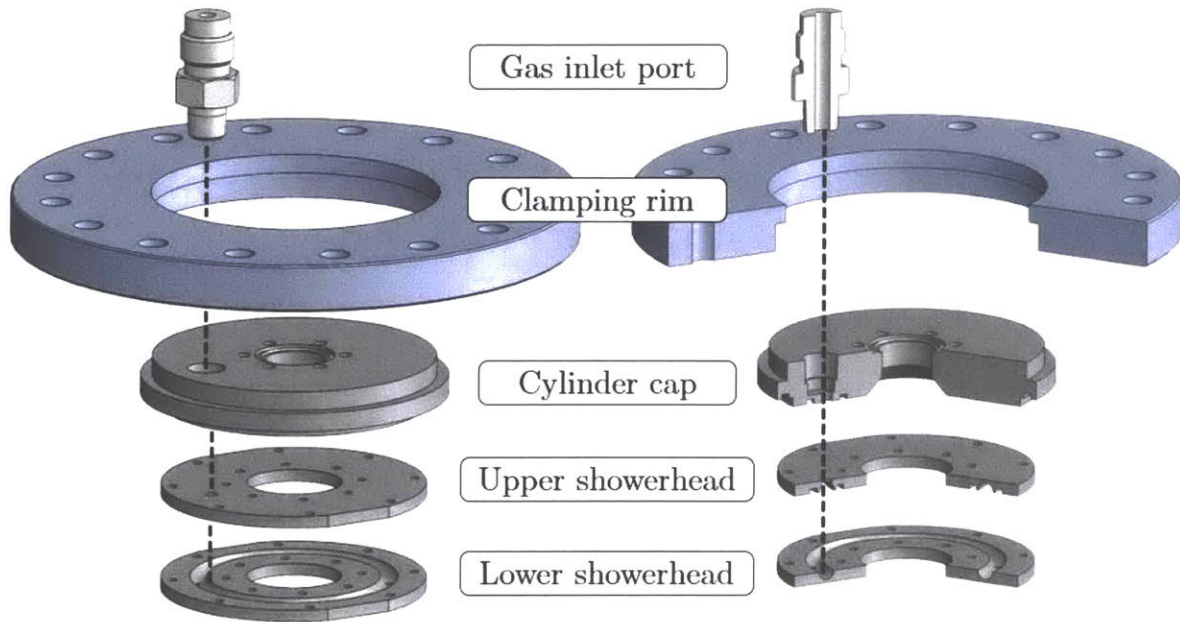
Exploded and cross-section views of the upper flange of UCA. The dotted line indicates the gas flow path.
